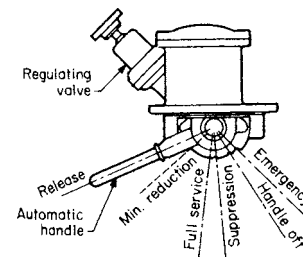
Automatic-brake valve-handle positions for 26-L brake equipment.
